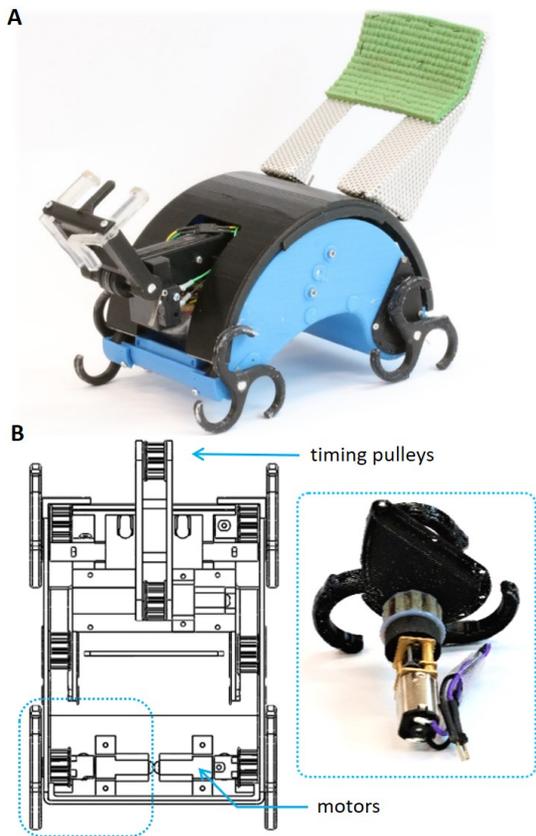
New mechanical design of the TERMES robot, with low-end 3D printed chasses (A), and simplified gear train (B - top view).
